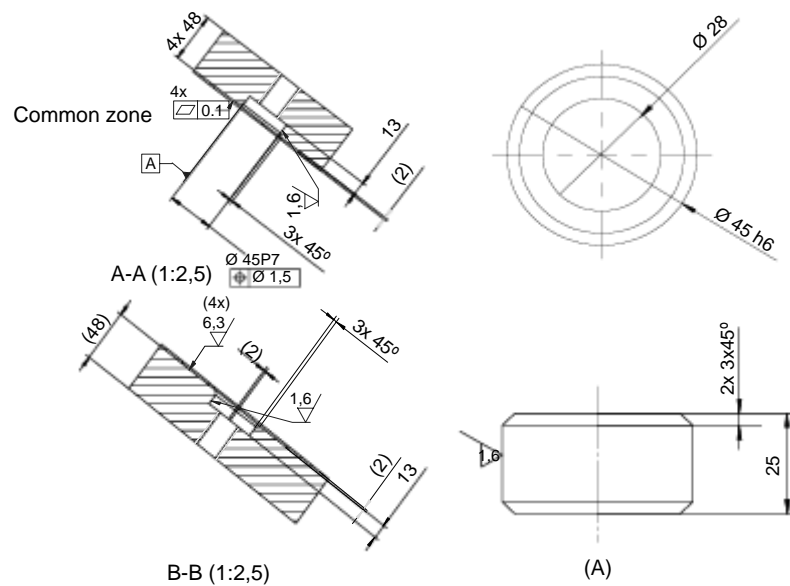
Sections of base plate and guide sleeve (dimensions in mm).
